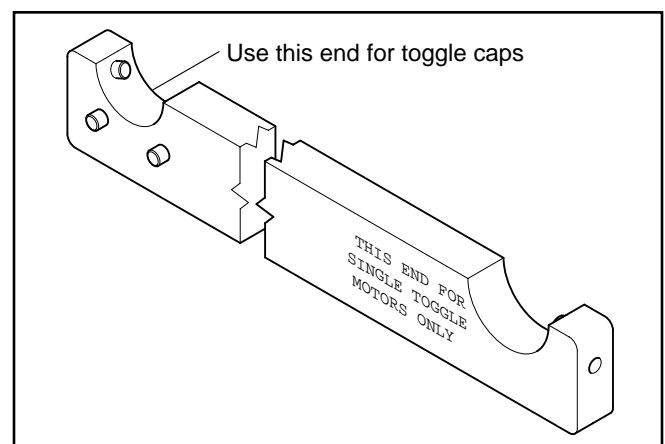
Spanner Wrench 398500-2 (Special Tool)
